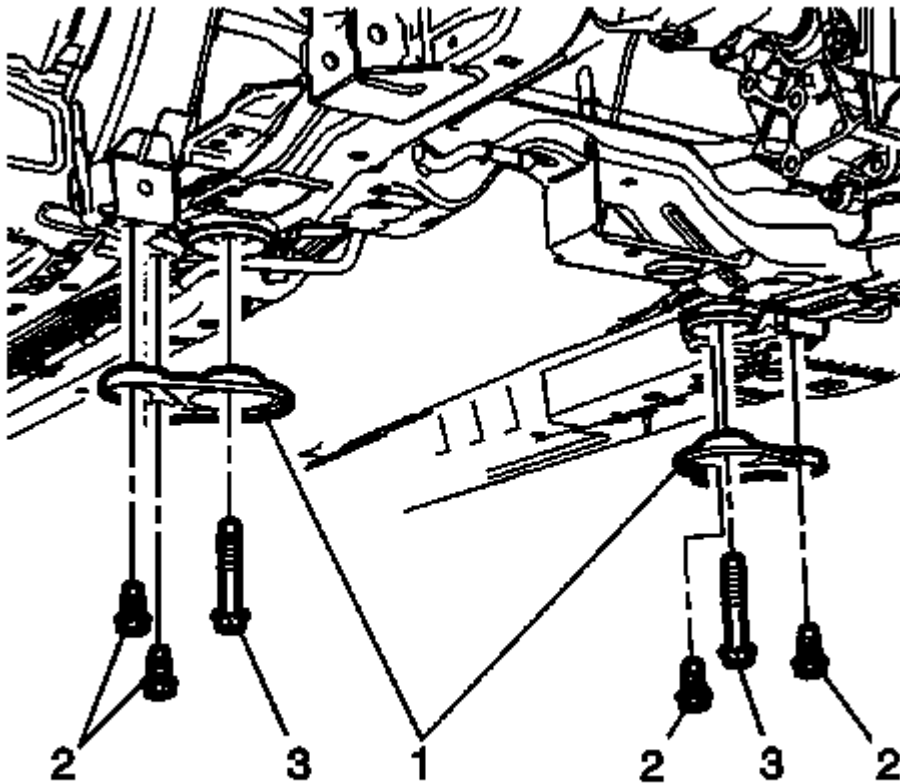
Drivetrain And Front Suspension Frame Reinforcements
